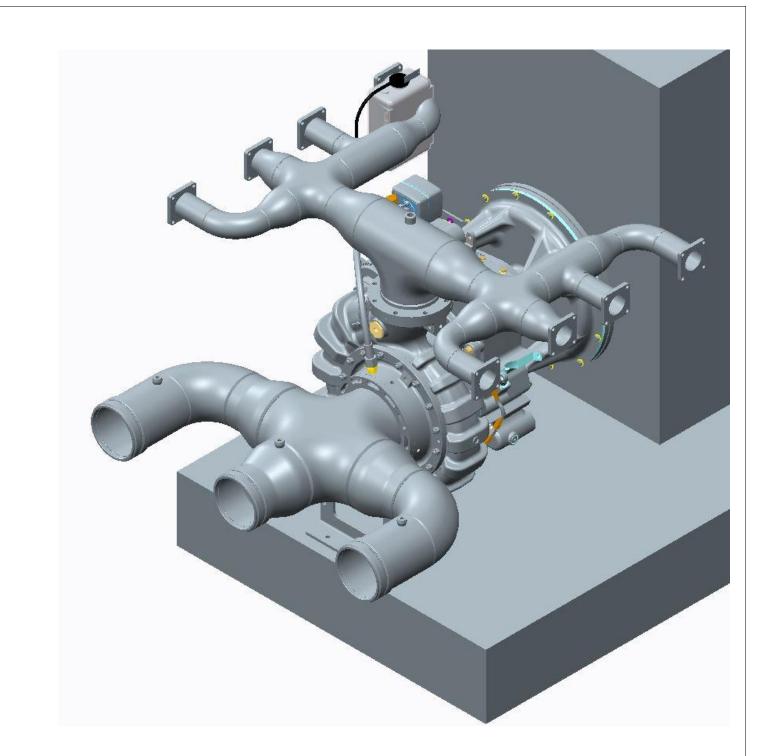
How the foot mounting bracket looks after it has been installed upon the ZSE pump. The foot mounting bracket can be attached to the foundation. The foot mounting bracket should be attached to the foundation to provide a vibration isolating support.
